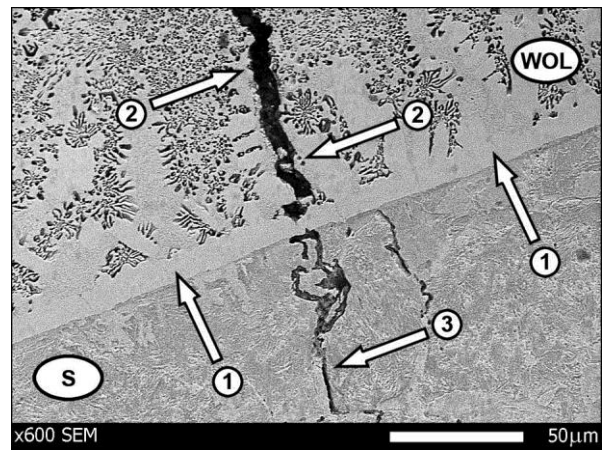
Microscopic image of the fusion zone of the EL-Hard 70 weld overlay layer. Clearly visible "strip" of alloy ferrite (1) in the fusion zone with single micro-cracks. Extensive micro-crack (2) in the padding weld present also in the substrate material. WOL - weld overlay layer, S - substrate.
